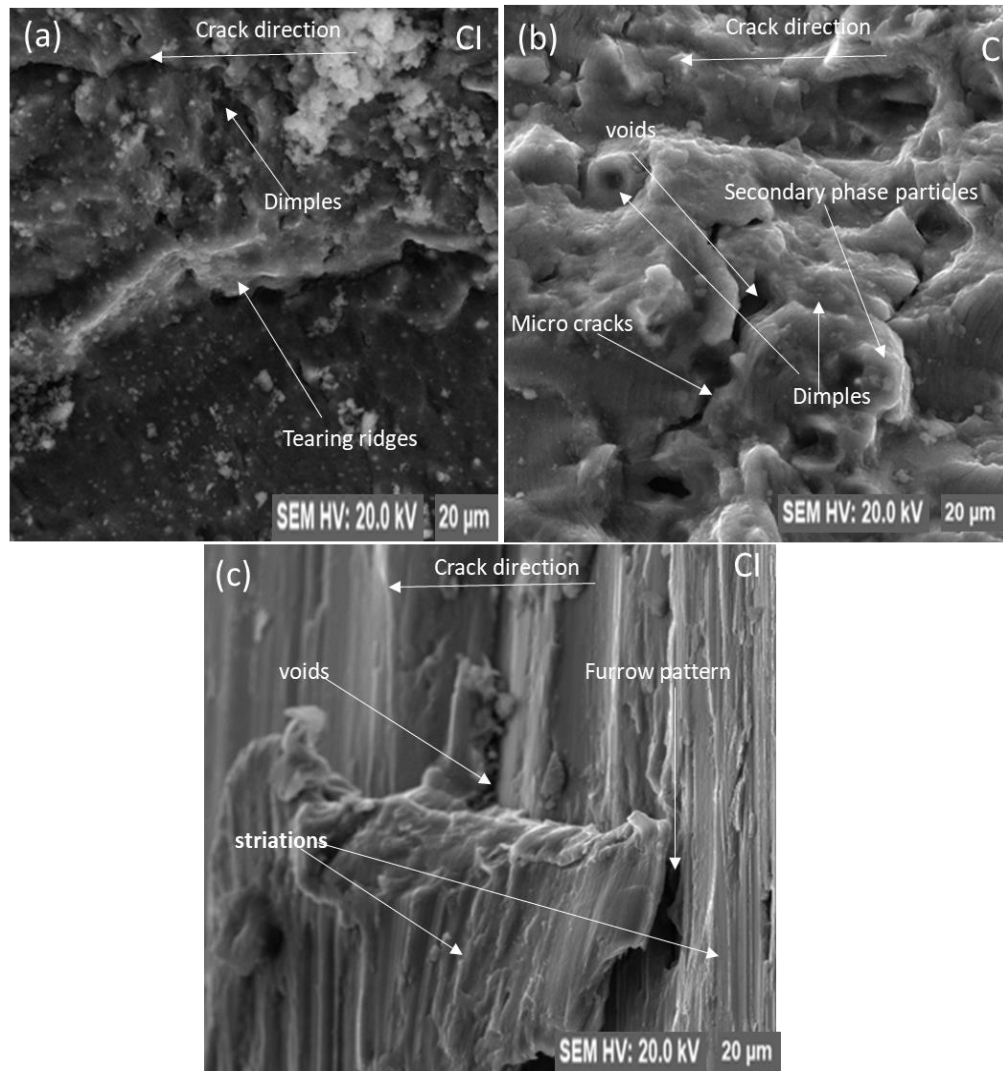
Fatigue-fractured surface morphology of the fatigue initiation of (a) Al alloy 7075-O, (b) Al alloy 7075-T6, (c) Al alloy 7075-T7.
